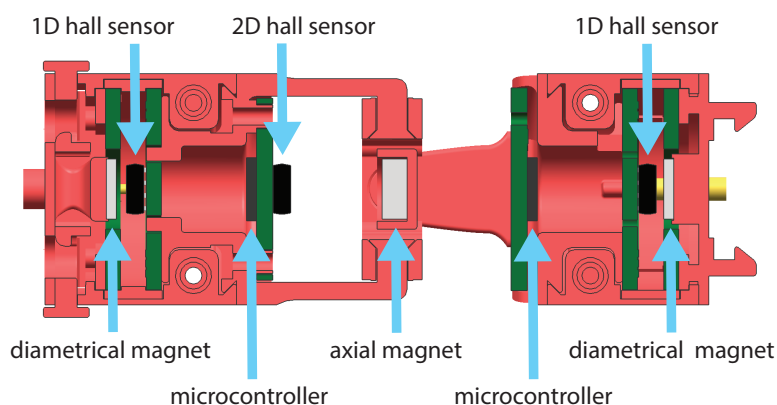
Joint cross-section showing passive diametrical and axial magnets, Hall sensors and micro controllers.
